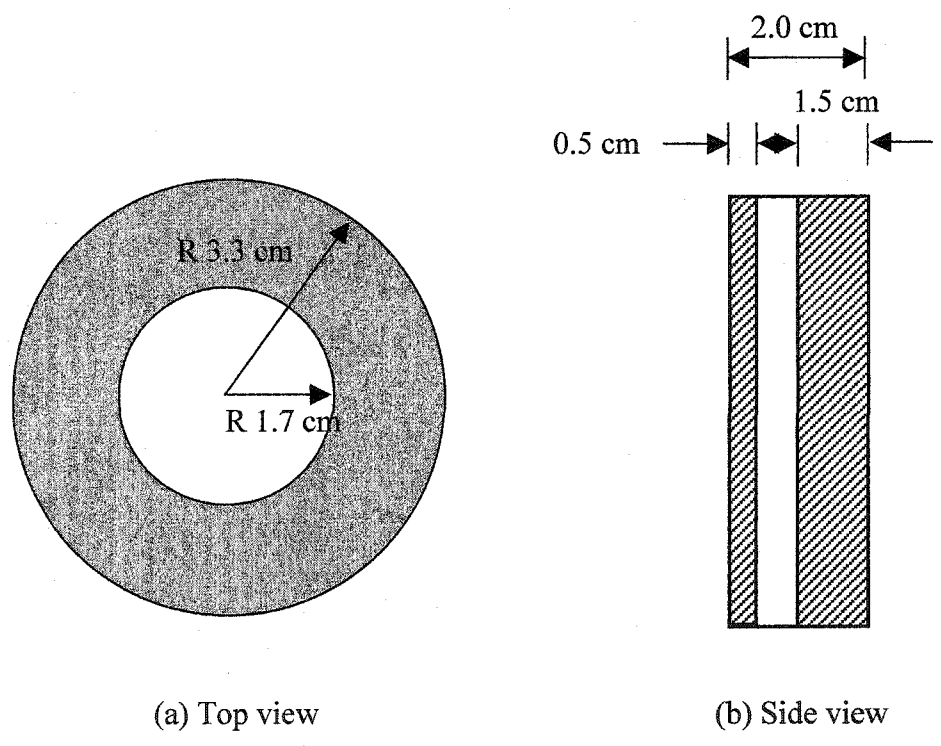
Plastic cover is used to seal the O-ring and sample holder together to prevent leakage as well as to keep the sample holder stationary during E-C test.
